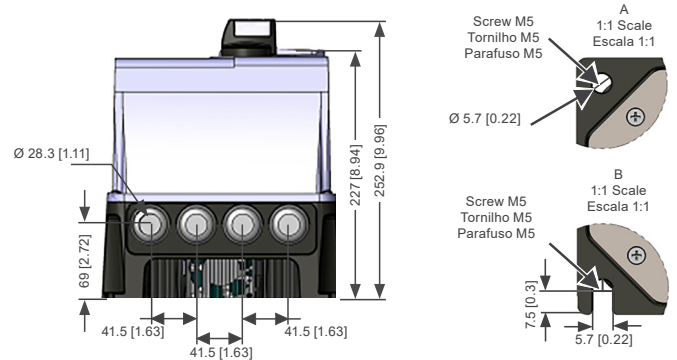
Dimensions of the CFW500 IP66 frame size B
